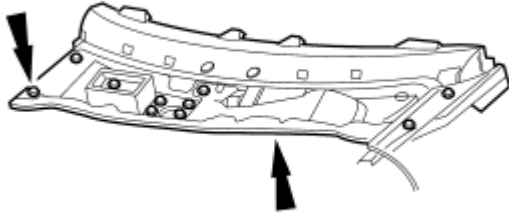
Locating Windshield Wiper Motor Electrical Connector
